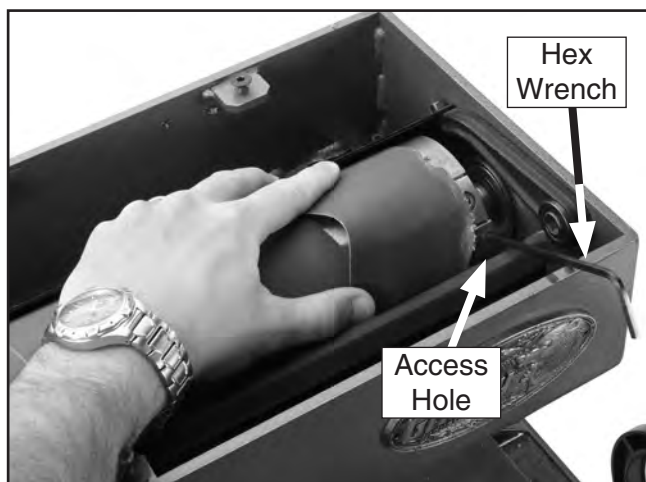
Hex wrench inserted into access hole on right tension wheel.
